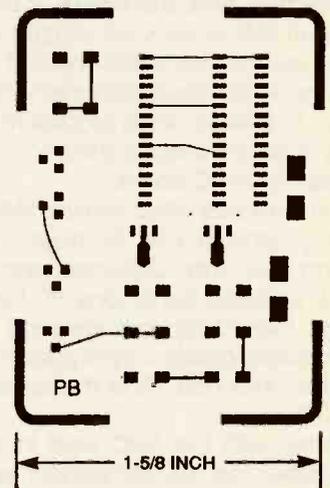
Fabricating this SMT practice board will give you practice in etching an SMT PC Board, and in mounting SMC's. It is shown here full size.
